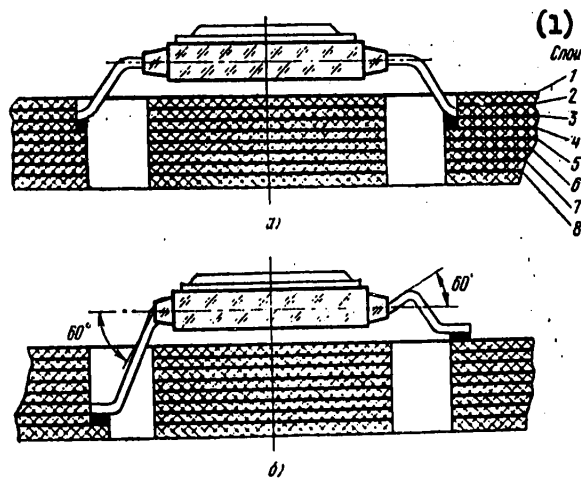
Correct (a) and incorrect (b) assembly of planar housings on a multi-layer printed circuit board with open contact pads.
